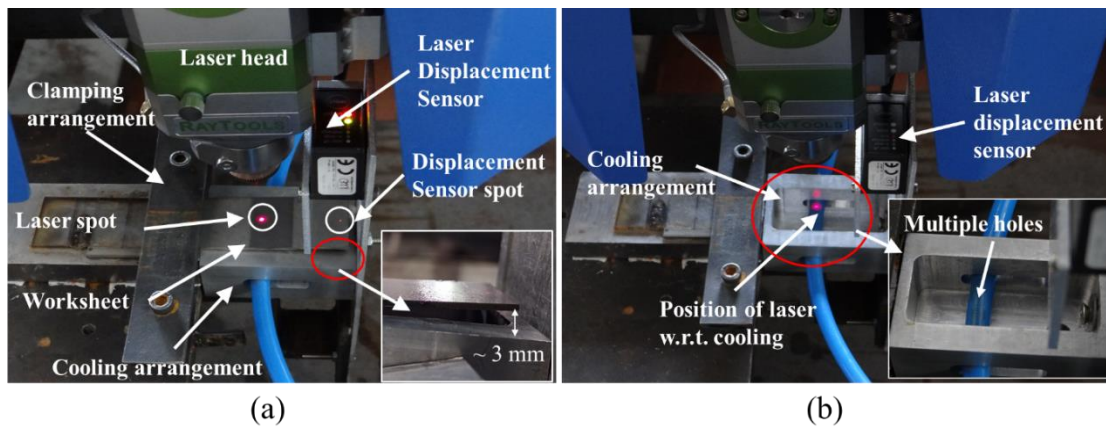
Experimental setup (a) position of laser head and laser displacement sensor, (b) cooling arrangement
